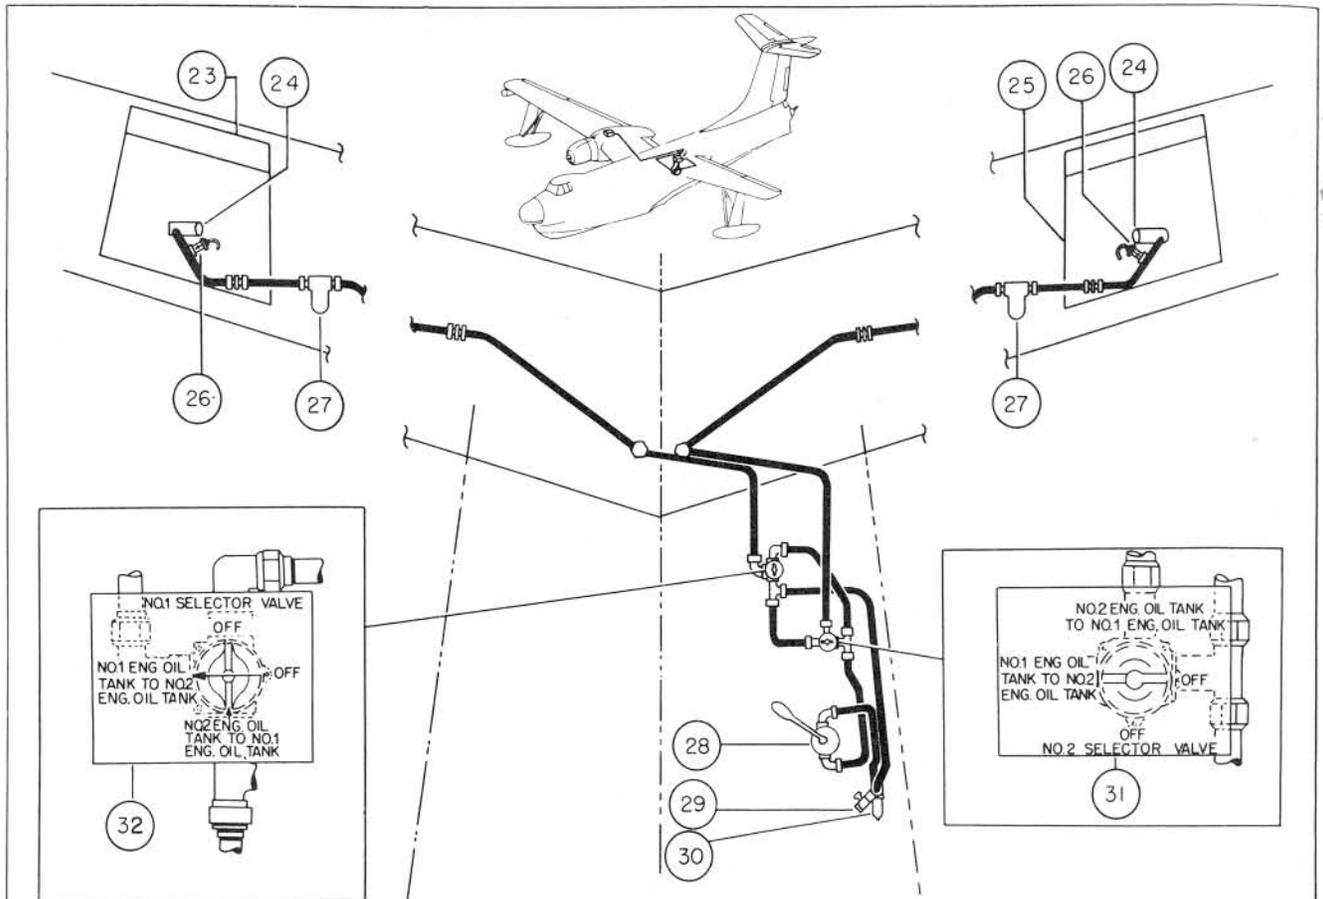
Oil System—Main Engine (Sheet 1 of 2)
